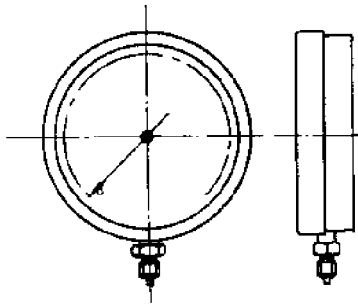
DIRECT MOUNTING GAUGE WITH BOTTOM CONNECTION
